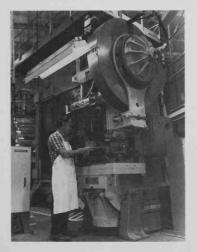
Standard machine tools played a large part in manufacturing up through the 1950's.
